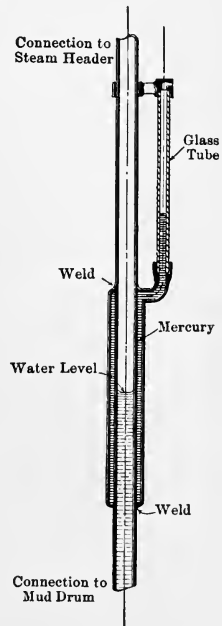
Water Level Gauge — Winslow High-pressure Boiler.
